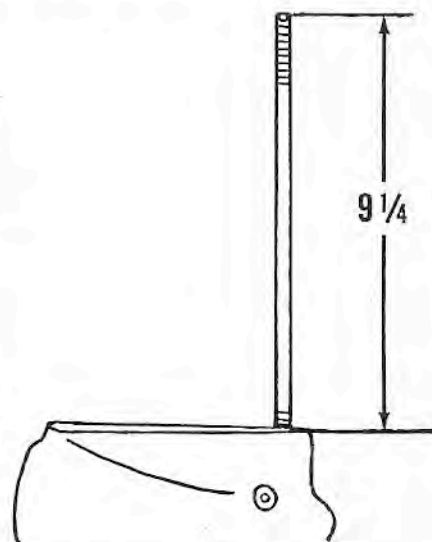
On early 35 and 40 horsepower models which use front stud as shift pivot, stud must be threaded into housing until center of pivot hole is crosswise and $9\frac{1}{4}$ -inches from mounting surface as shown.
